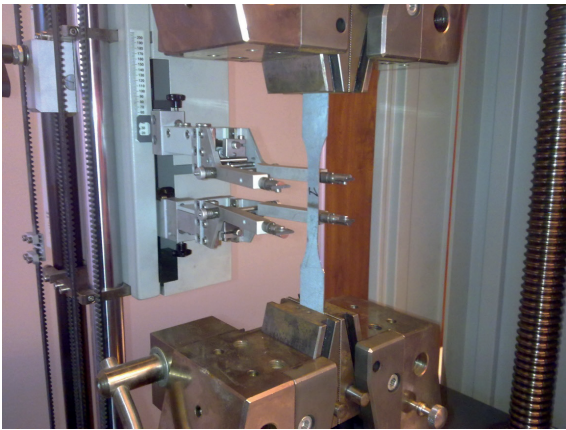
A view of the tensile sample during static tensile test of a butt joint of 0.8 mm thick electro-galvanized steel sheet DC04
